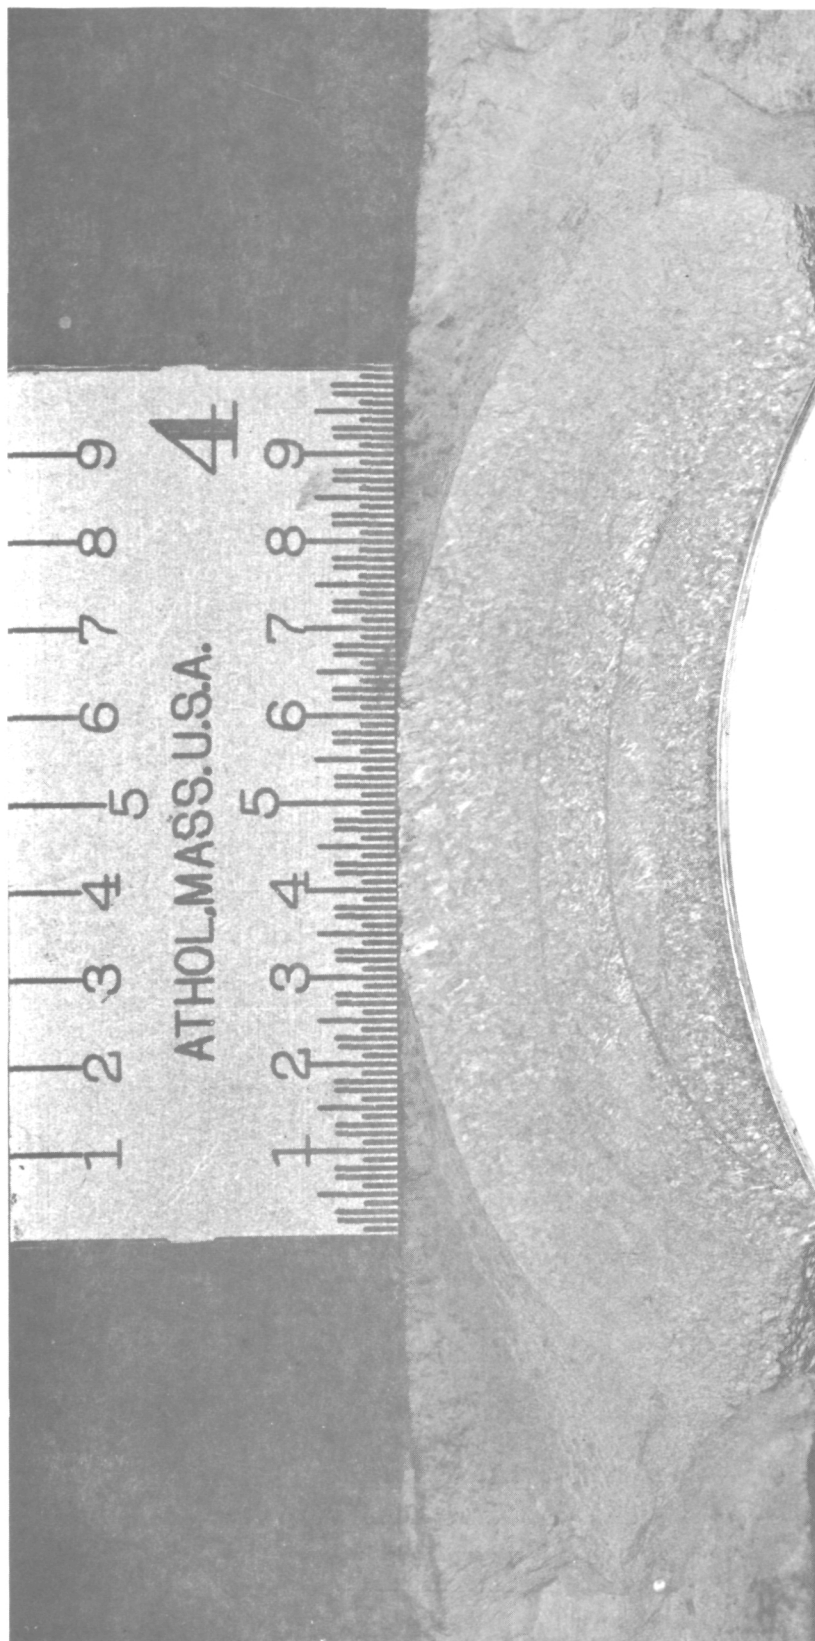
Fractograph of 2219 aluminum weldment.
